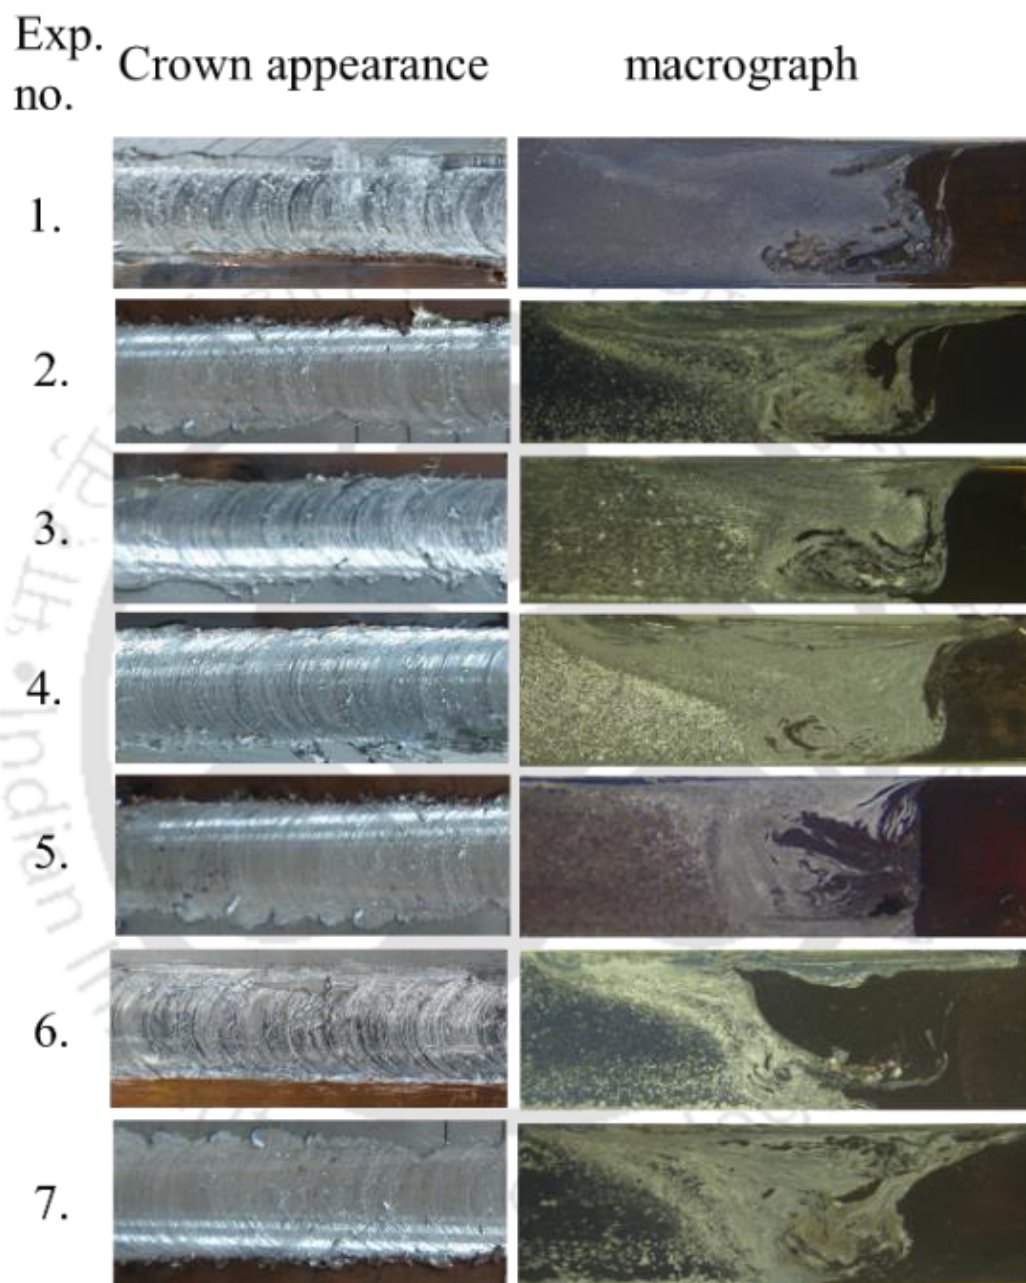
Crown appearance and macrograph of weld joint corresponding to welding conditions of Table 4.14 from Exp. 1 to Exp. 7.
